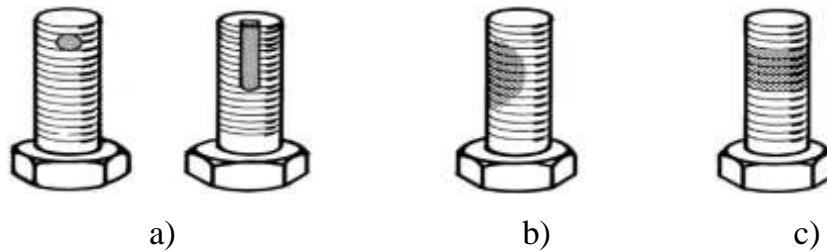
Self-locking screws and bolts (a) nylon insert (b) nylon layer (c) adhesive film
